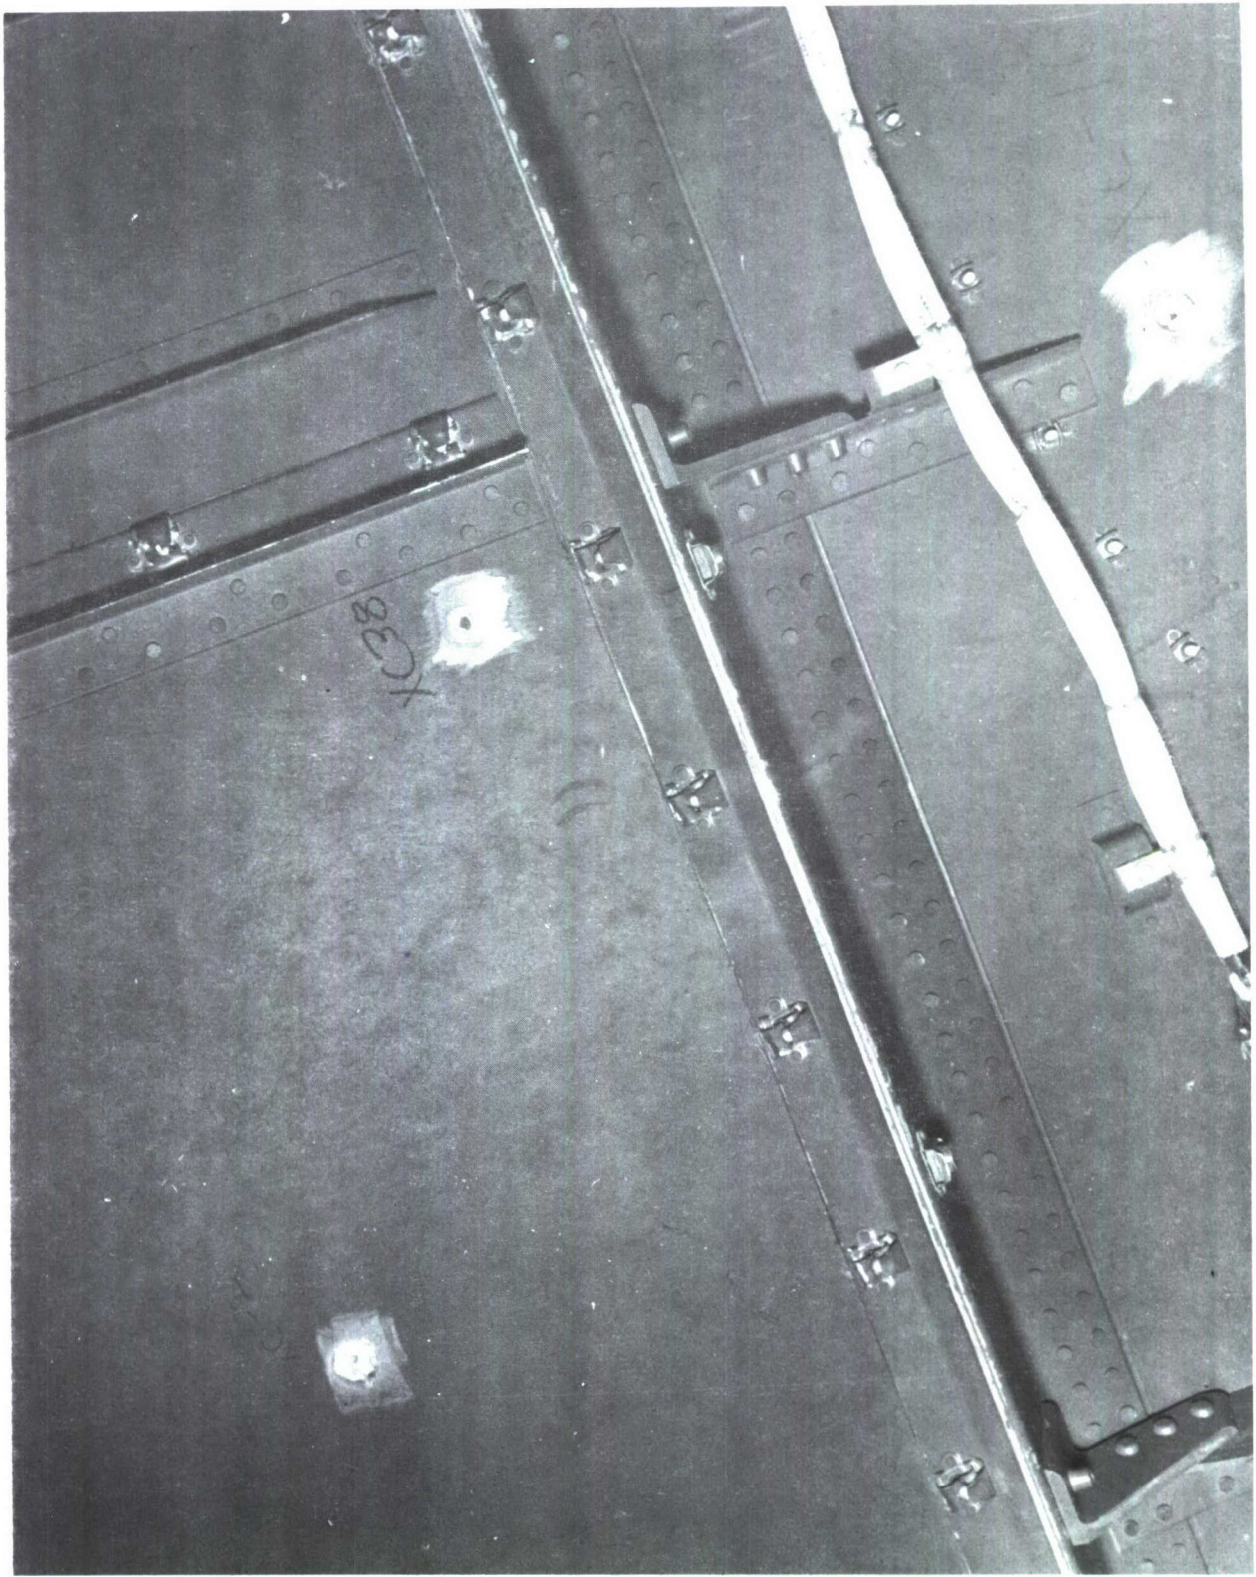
INSIDE VIEW OF R.H. SIDE OF VEHICLE EQUIPMENT BAY, F.S. 536.0-600.0
